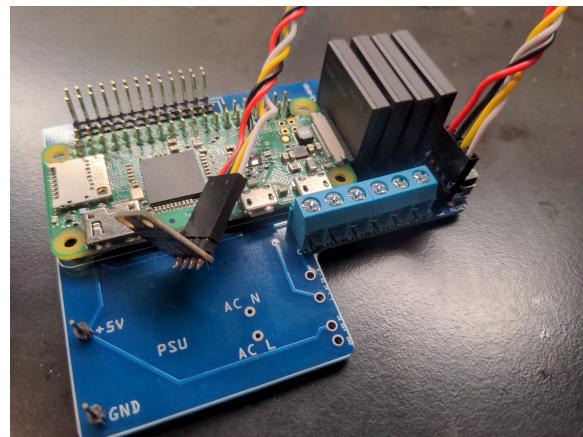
Fully assembled HestiaPi with headers for a DC power supply
